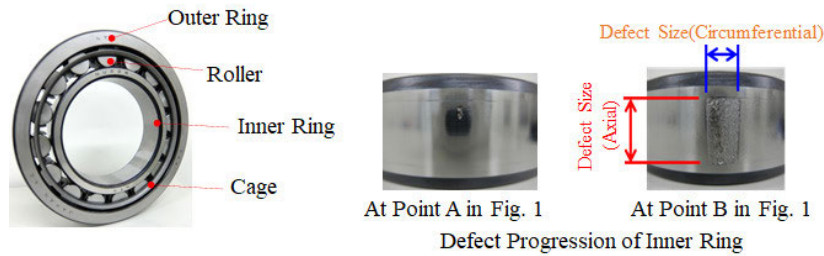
Overview of rolling bearing and defect shape on the raceway surface of the inner ring.
